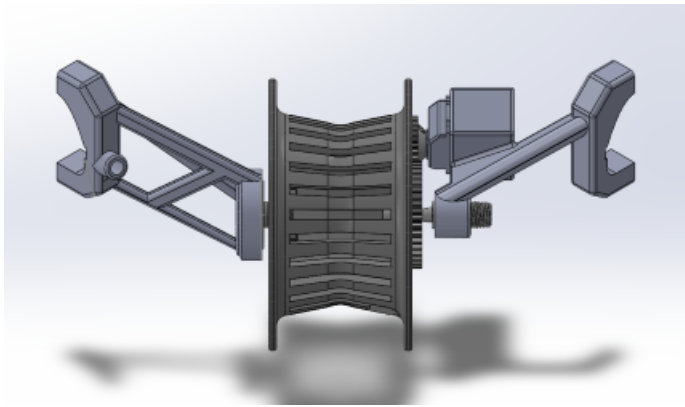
A CAD assembly of the Spool Mechanism Subsystem.
